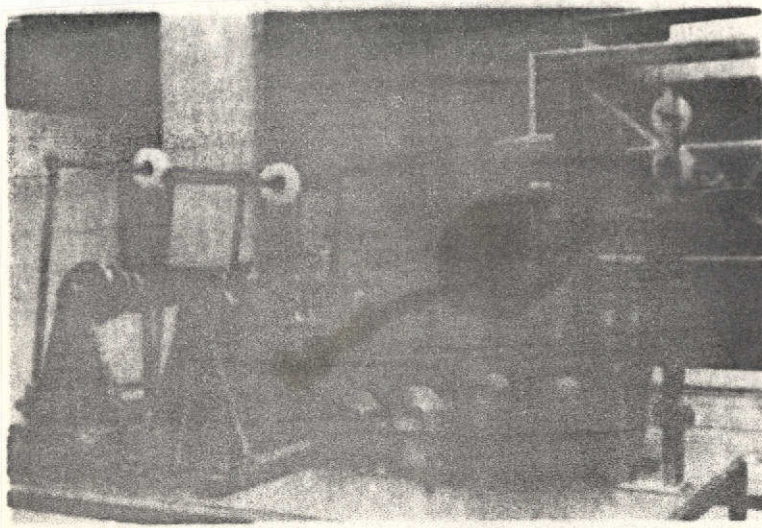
Partial view of wet winding apparatus: unwinding and impregnating mechanisms
